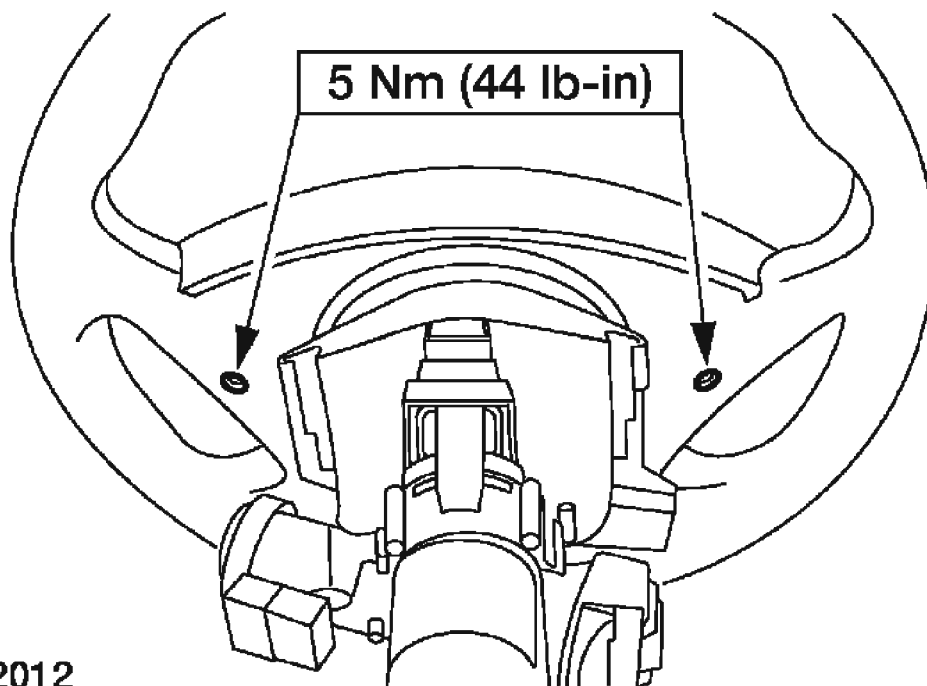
Connecting Speed Control Electrical Connector And Installing Bolt
